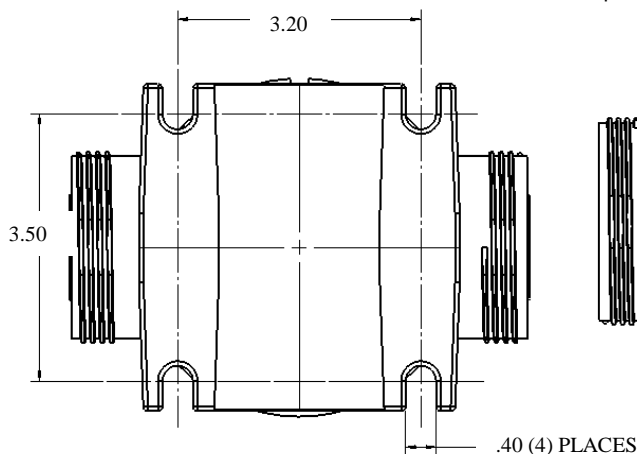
SB-Series base mounting pad (bottom view) – 1/2" thru 1".
